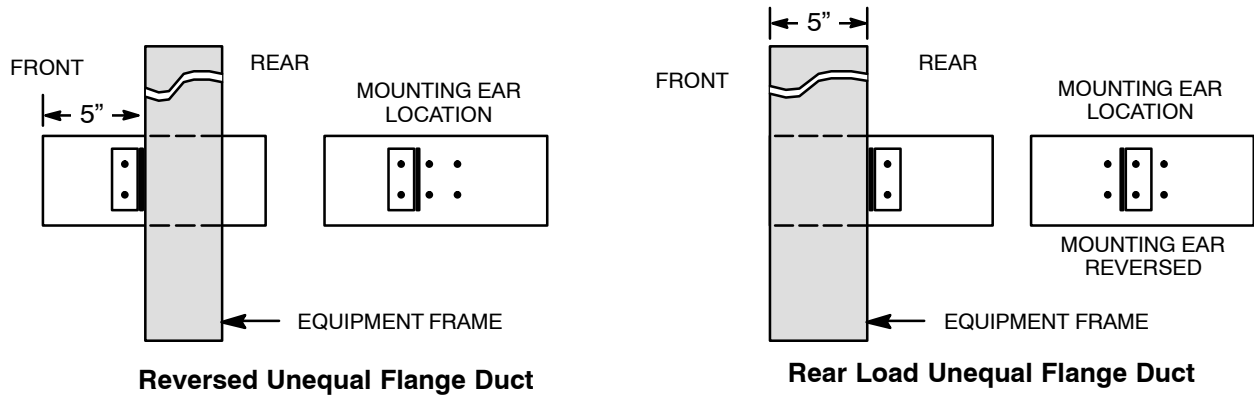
Equipment Horizontal Mounting—Unequal Flange Duct
